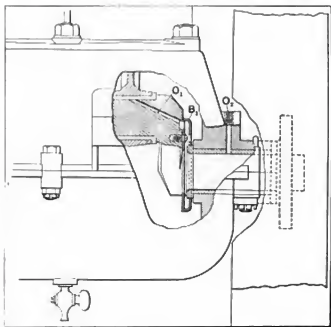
Moon, presenting a detail in the method of lubricating the crankshaft, indicating ingenuity
